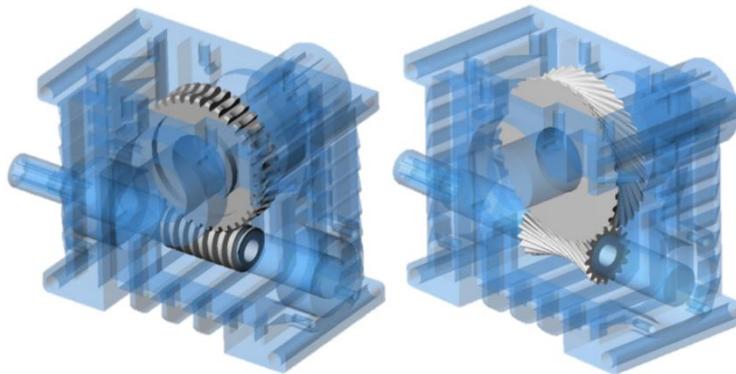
Worm gearbox and gearbox with developed spatial gear
